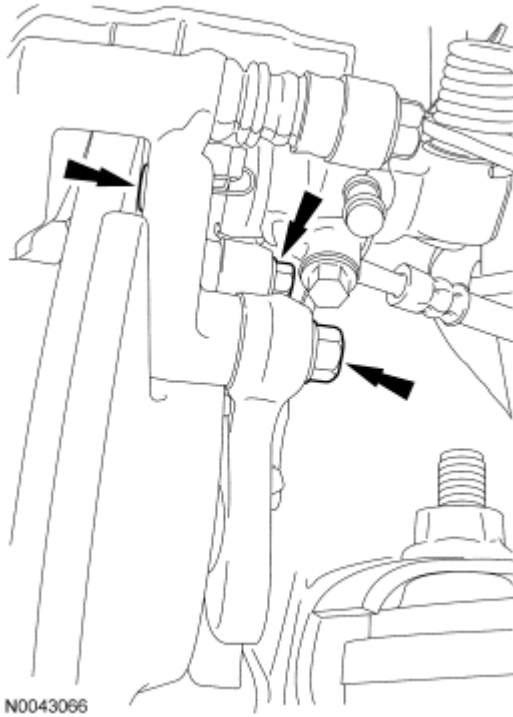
Locating Rear Hub Spindle-To-Brake Caliper Bolts
